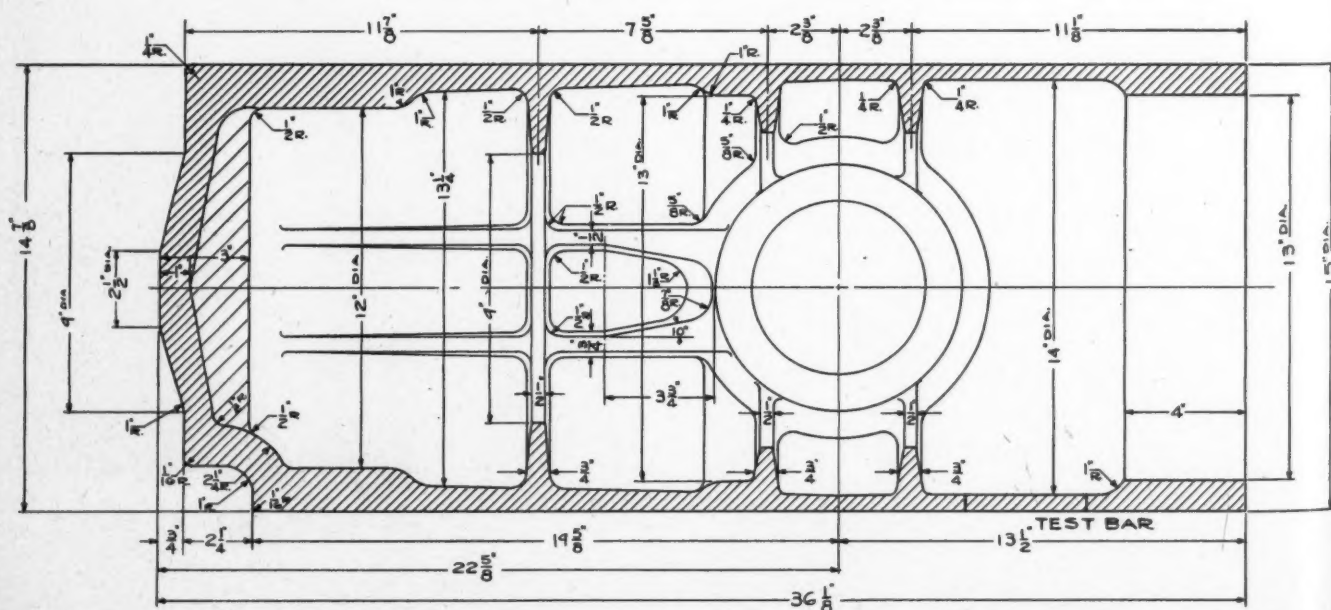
(below)—Cross-sectional drawing of deisel engine piston.
